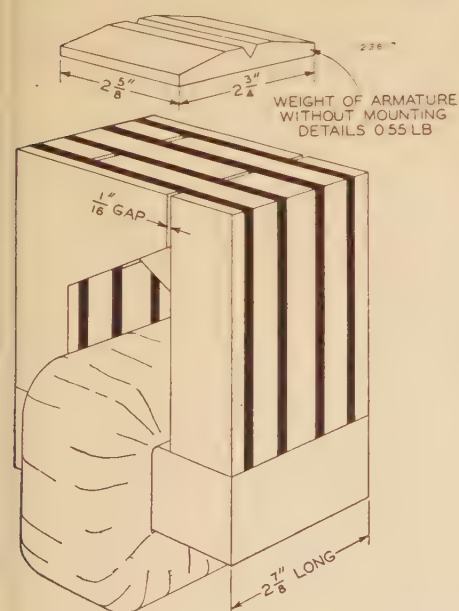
Design of holding magnet used in one-quarter-cycle breaker
